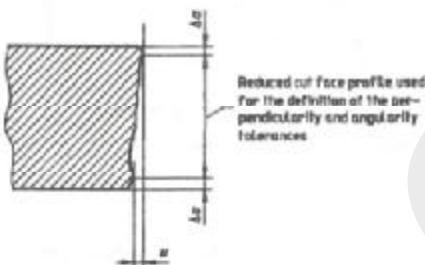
Definition of measuring area for perpendicularity and angularity tolerances
